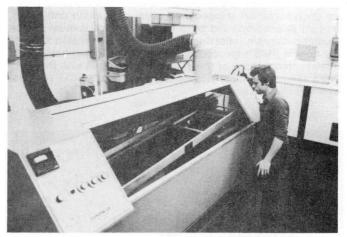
All Matrox boards pass through a wave solder machine which turns out consistent excellent results.
